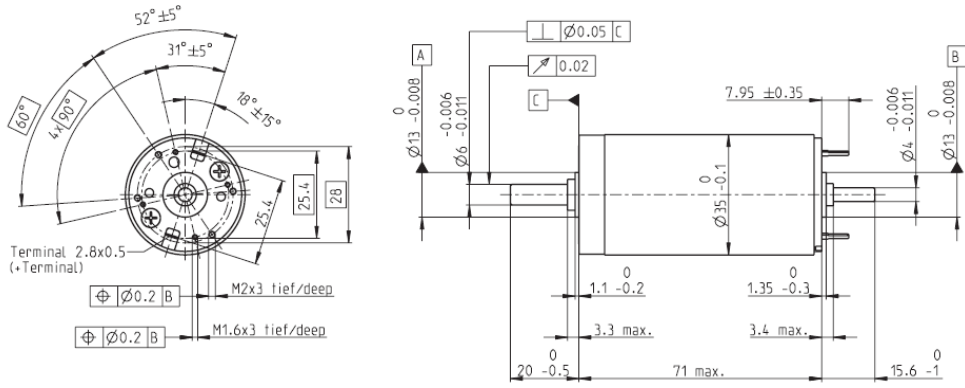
Motor Maxon RE-35 90W (323890) [5].
